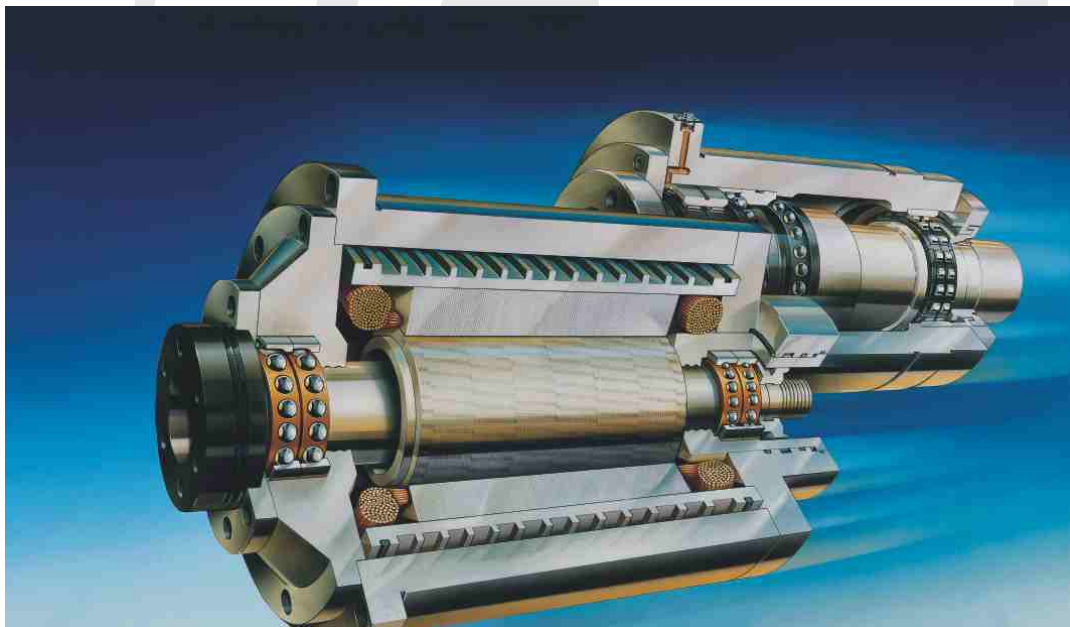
High speed spindle bearing (SKF, D-Schweinfurt)
